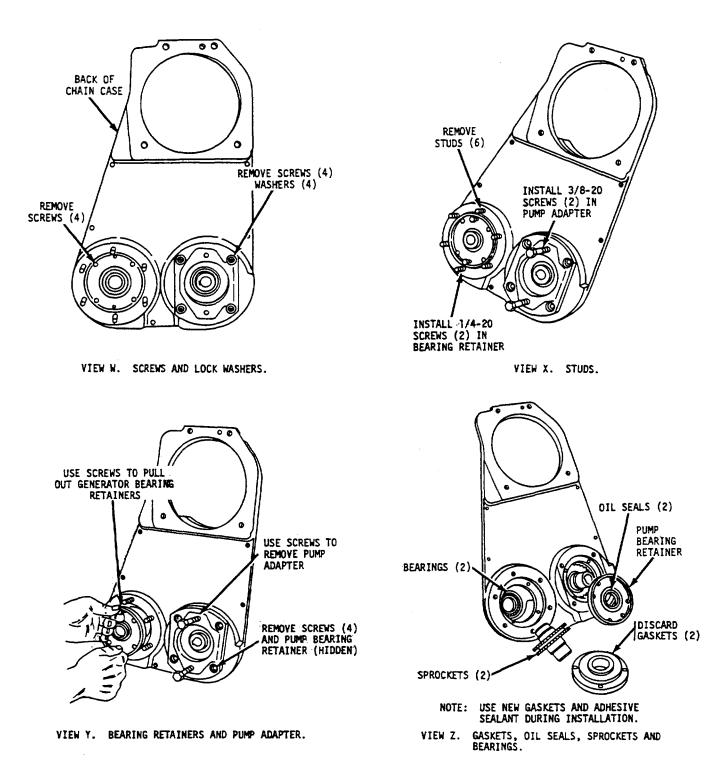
Auxiliary power unit-disassembly and assembly (Sheet 6 of 6).
